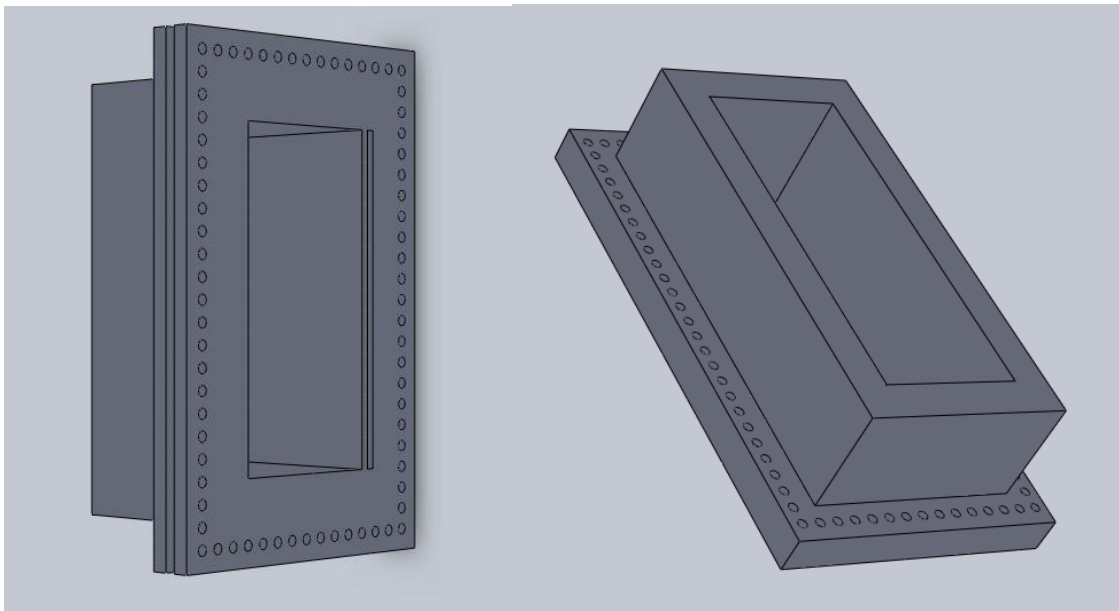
SolidWorks models of the 3D printed attachment rings
